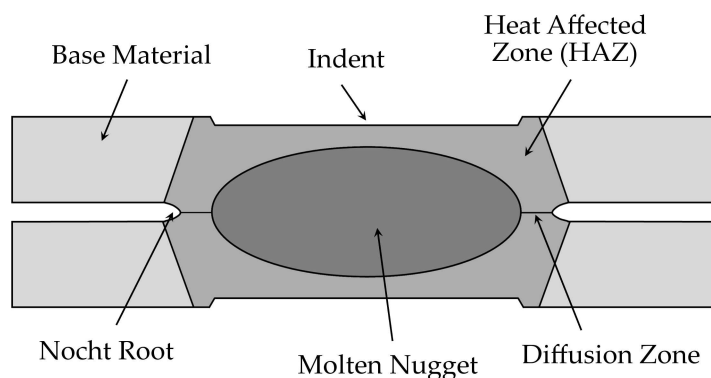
Scheme of a spot weld cross section showing the molten nugget, the HAZ and the base material.
